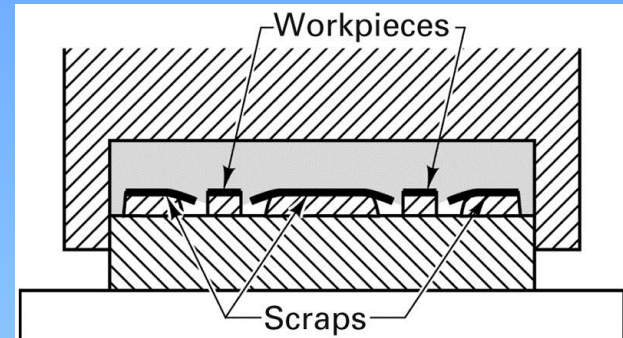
Method of blanking sheet metal using the Guerin process.
